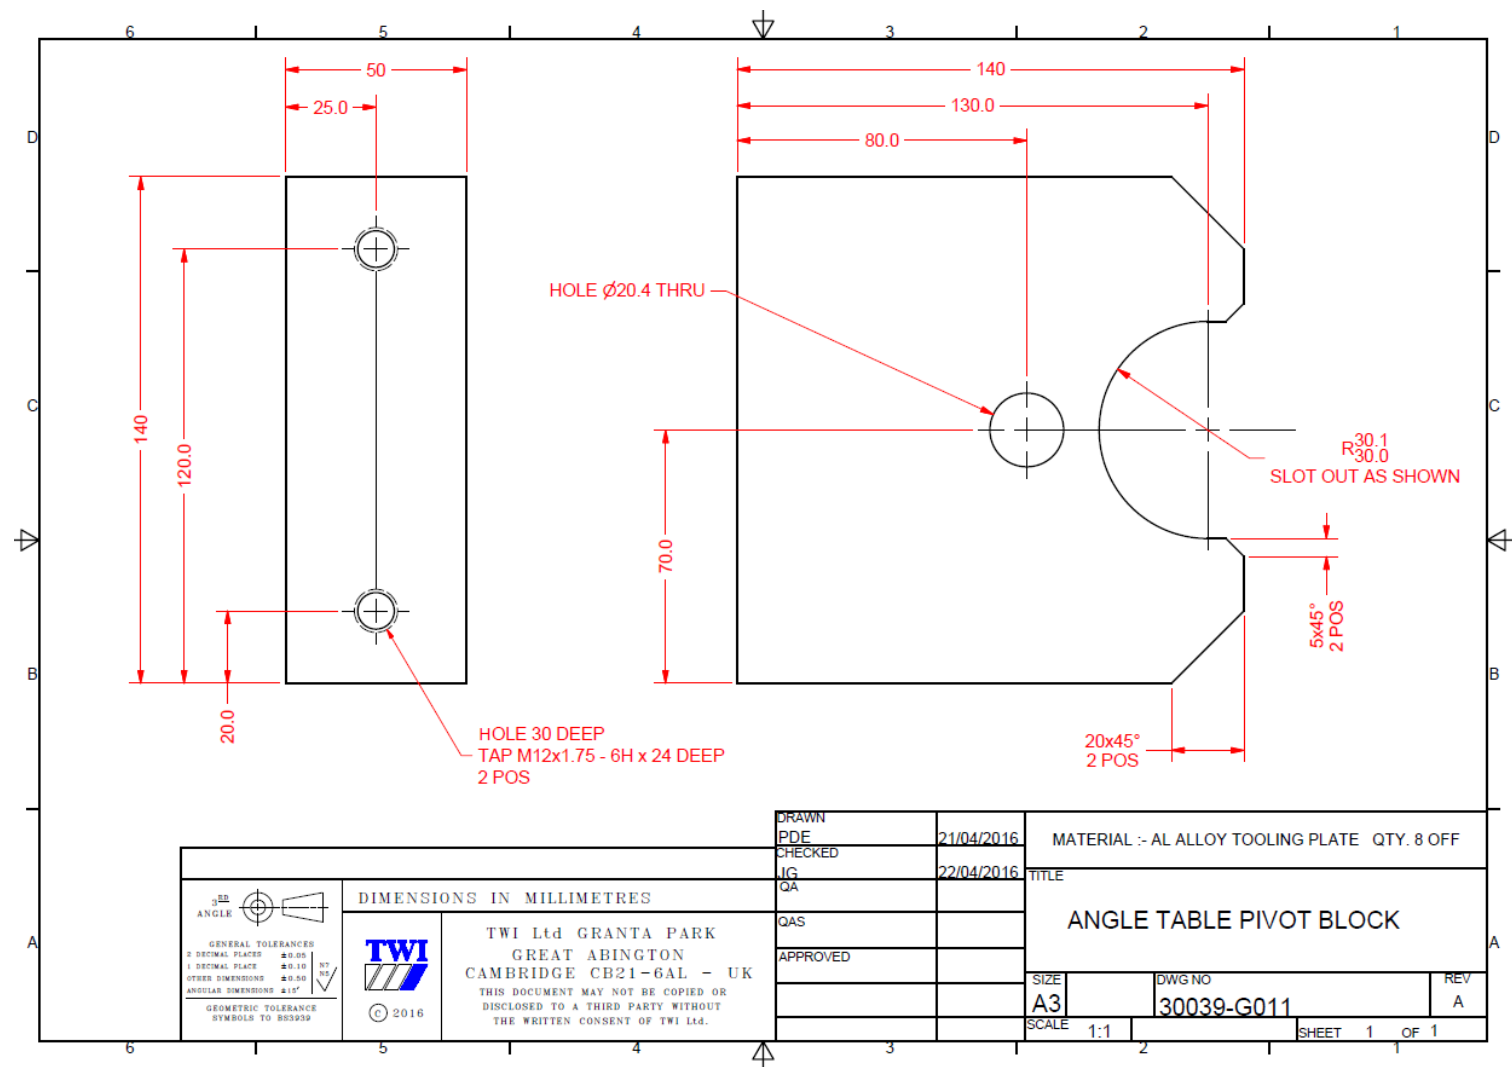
Technical drawing of the pivot block of the tilting table.
